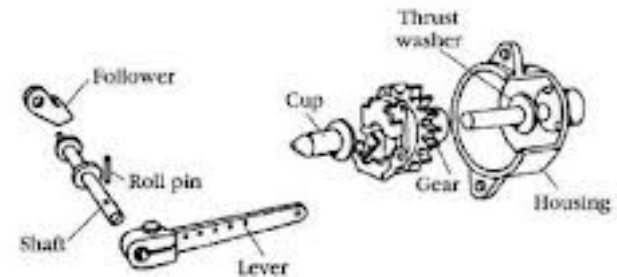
The governor mechanism used for 60000, 80000, and 140000 engines. The housing, accessed from outside of the engine, is unique to this engine family; all other centrifugal governors live inside of the crankcase. The pinch bolt that secures the lever and shaft is the main adjustment point for this and most other Briggs & Stratton governors and should not be disturbed during normal service activities, including engine overhaul.
